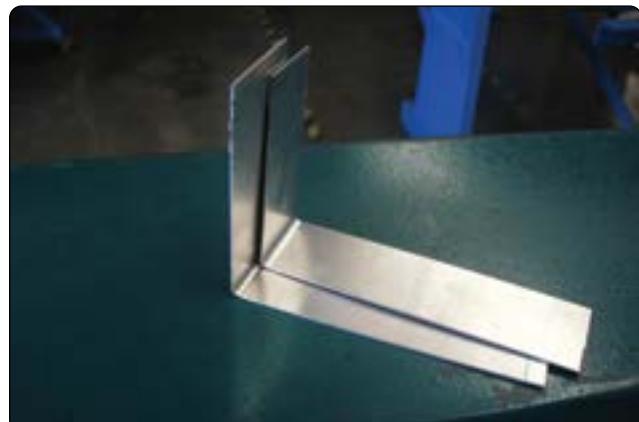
Brake alignment with two test strips 3 inches from each end.
